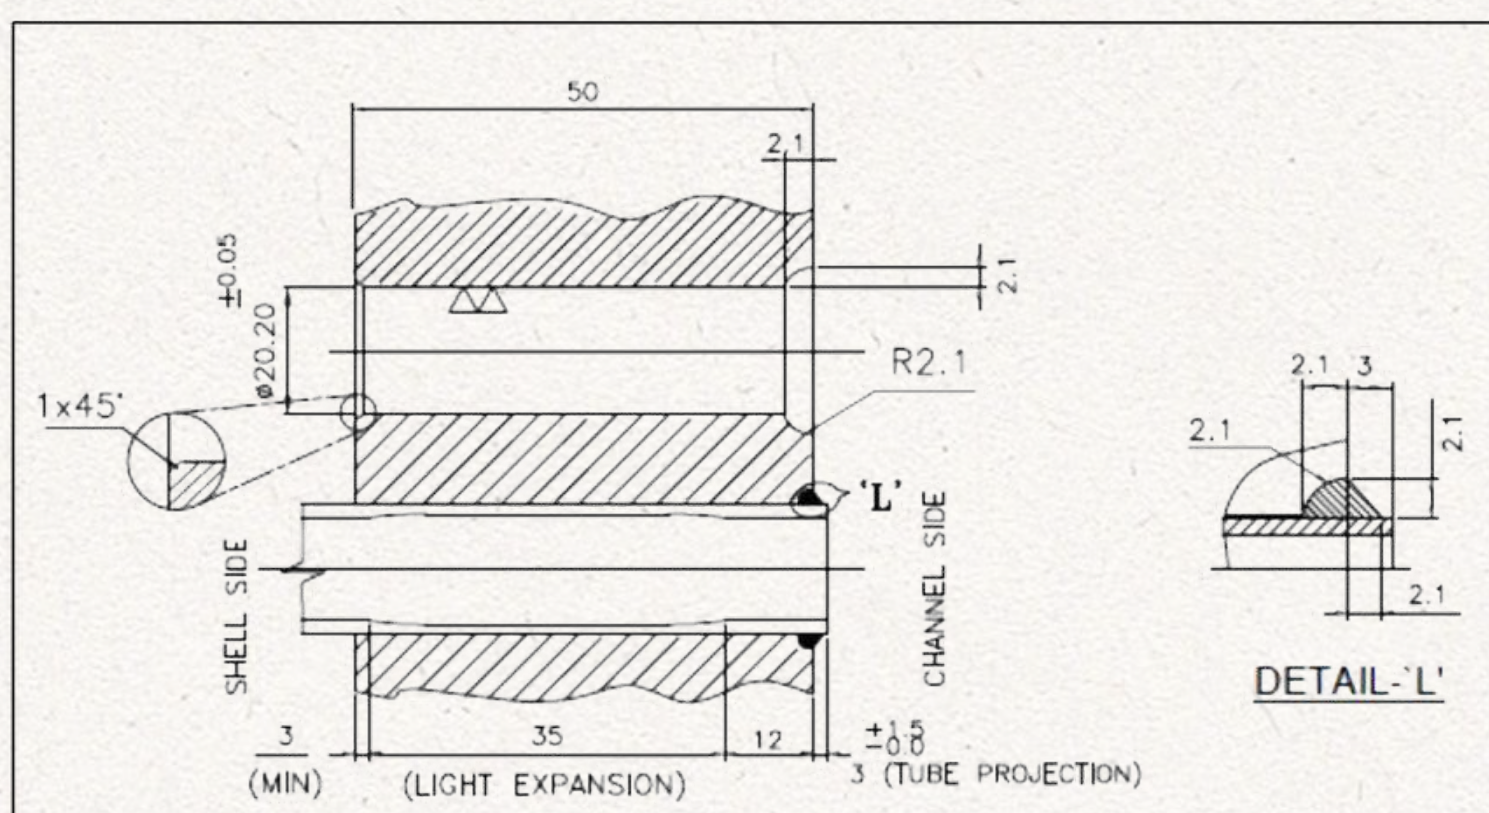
Tube to Tube sheet weld joint configuration
